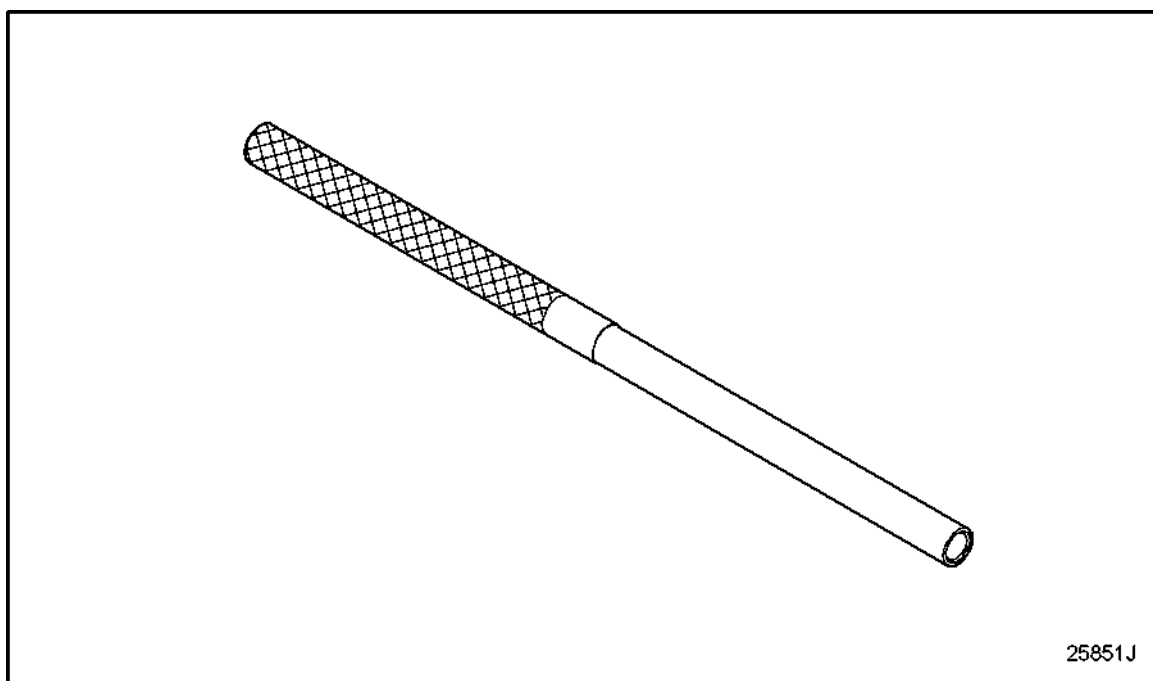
Injector Spray Tip Driver J 1291-02
